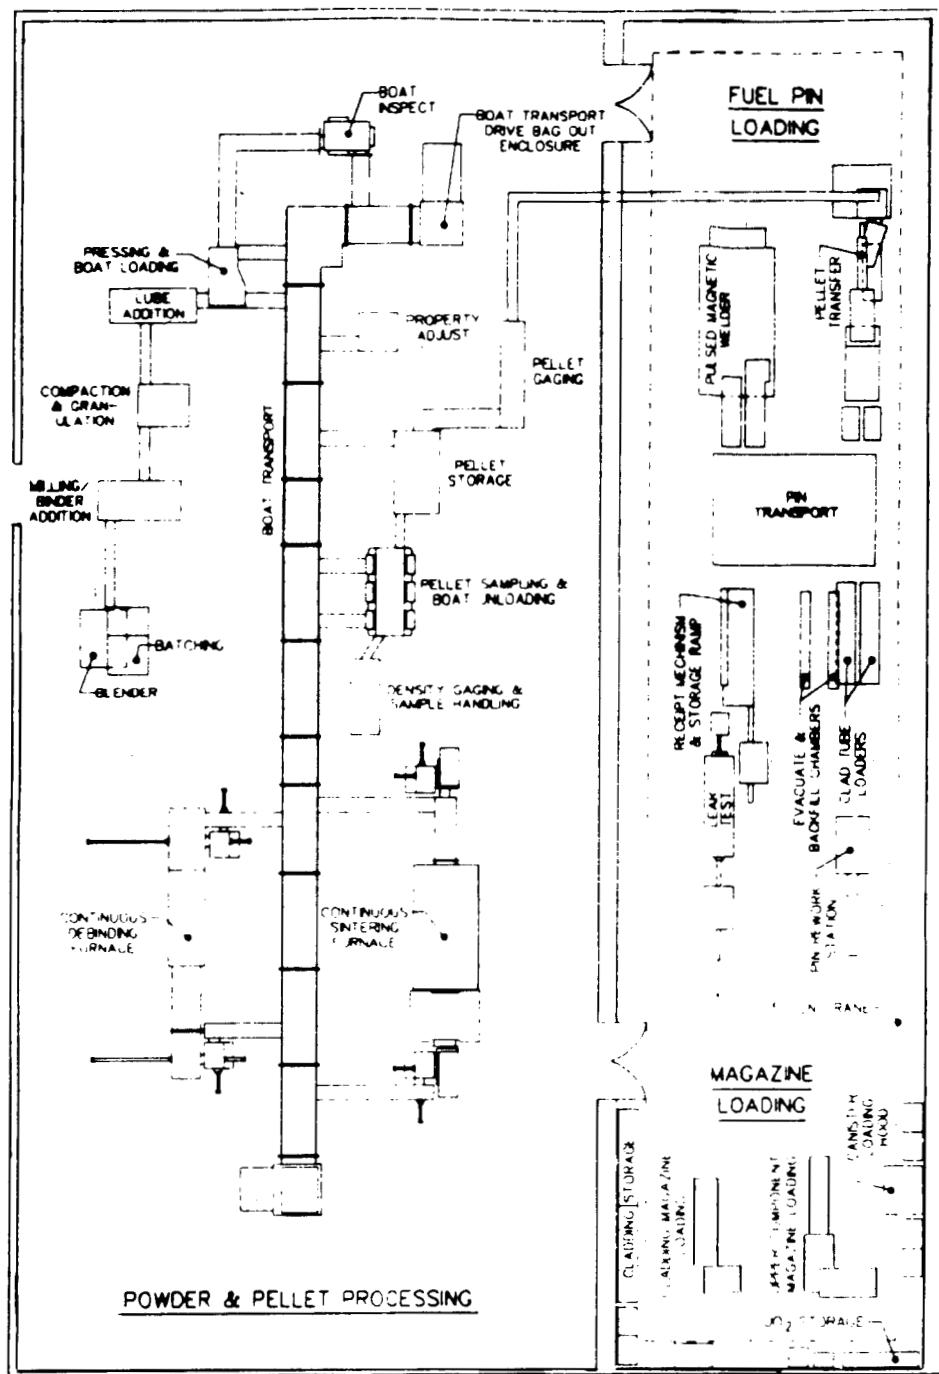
Pellet and fuel pin fabrication equipment layout.
